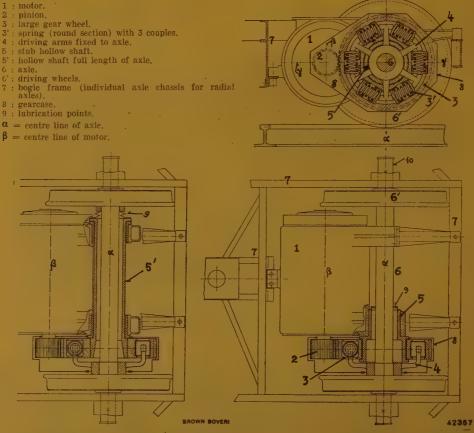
Diagram of Brown-Boveri springs and couples for railcars. The horizontal sections shew, left the complete hollow shaft and, right the short, stub, shaft (see also figs. 147-150).
